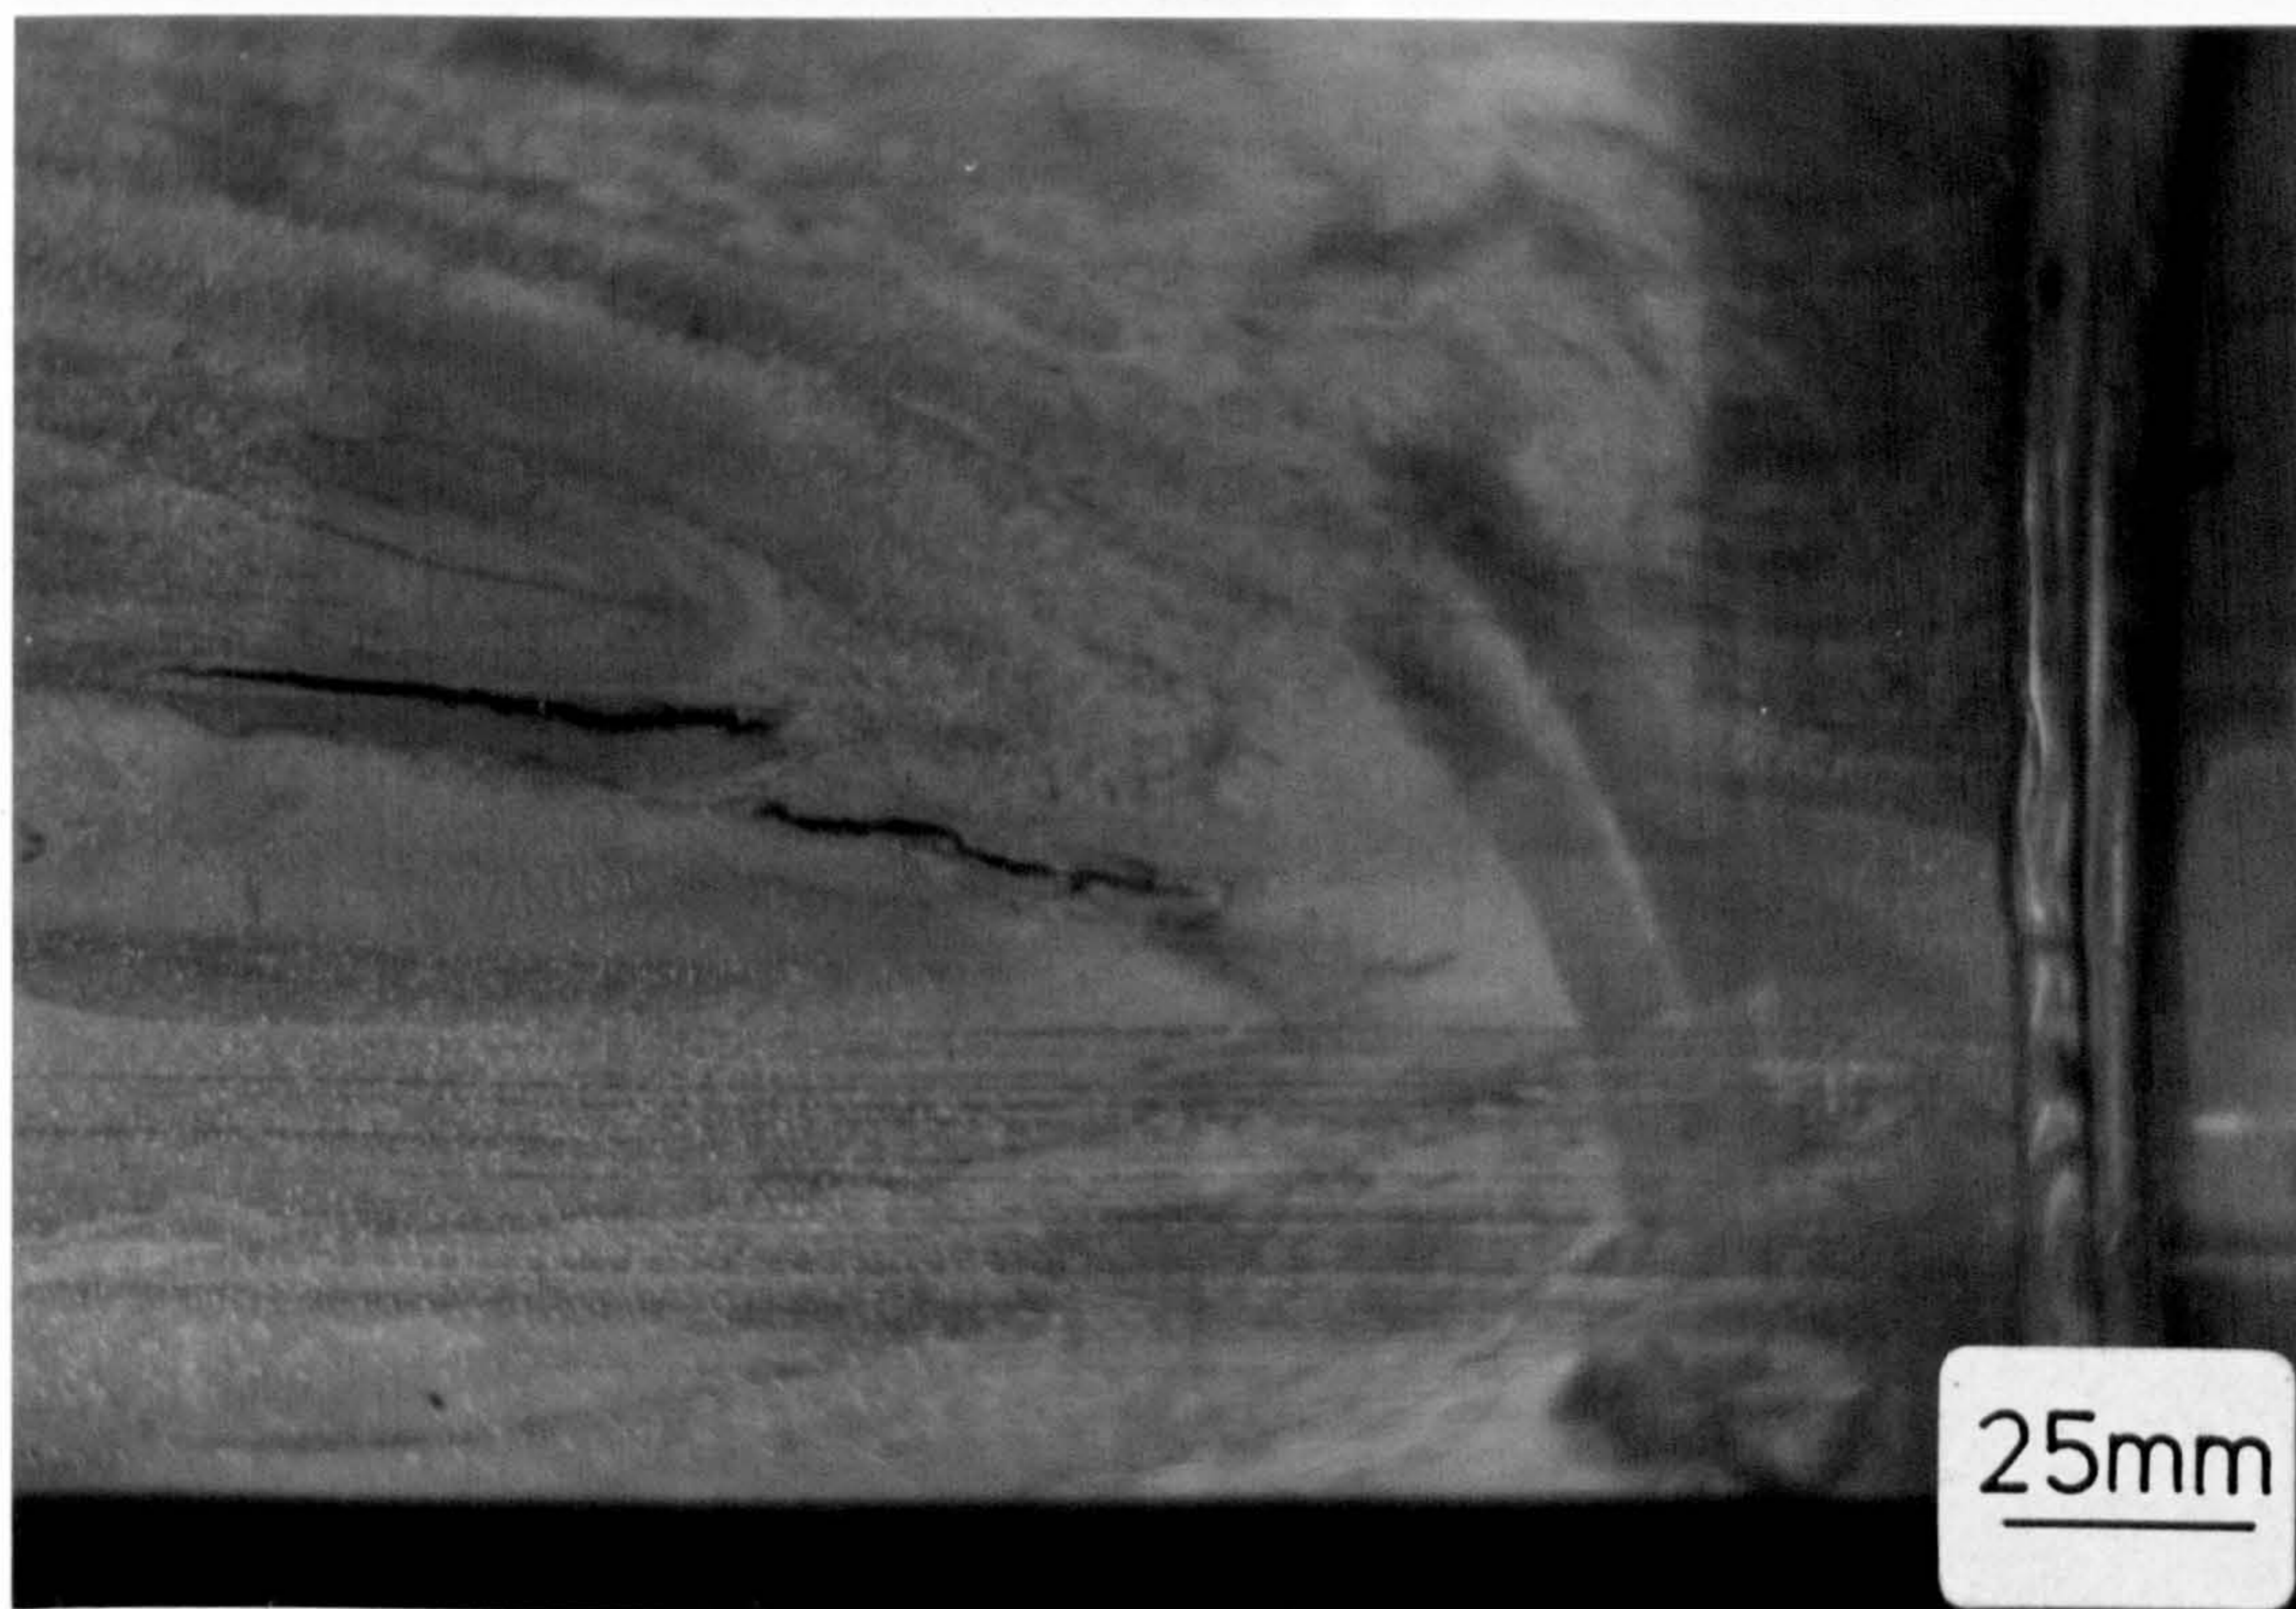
Example of the external appearance of a brittle fracture through the wall of an injection moulded tee (T4).
